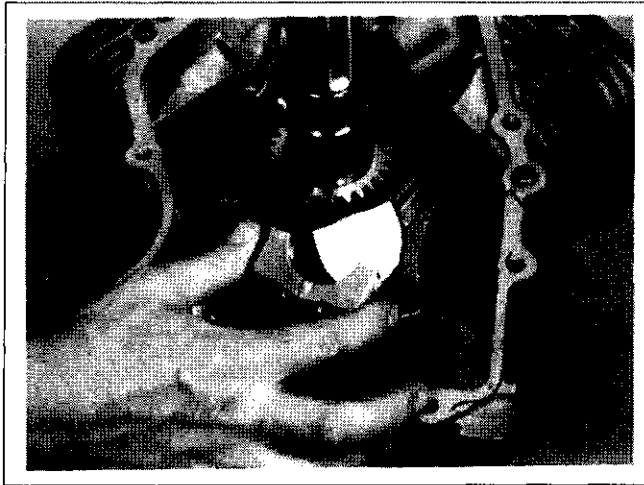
Mark End Cap with Cylinder Number Before Removal.
